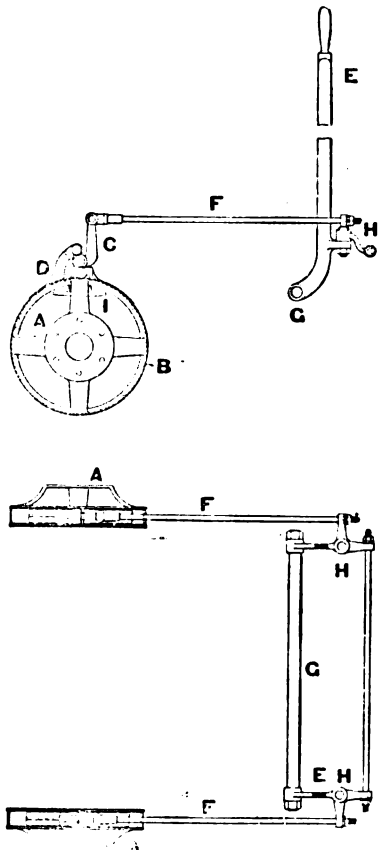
Elevation and Plan of Rear Brakes on Argyll Cars.
